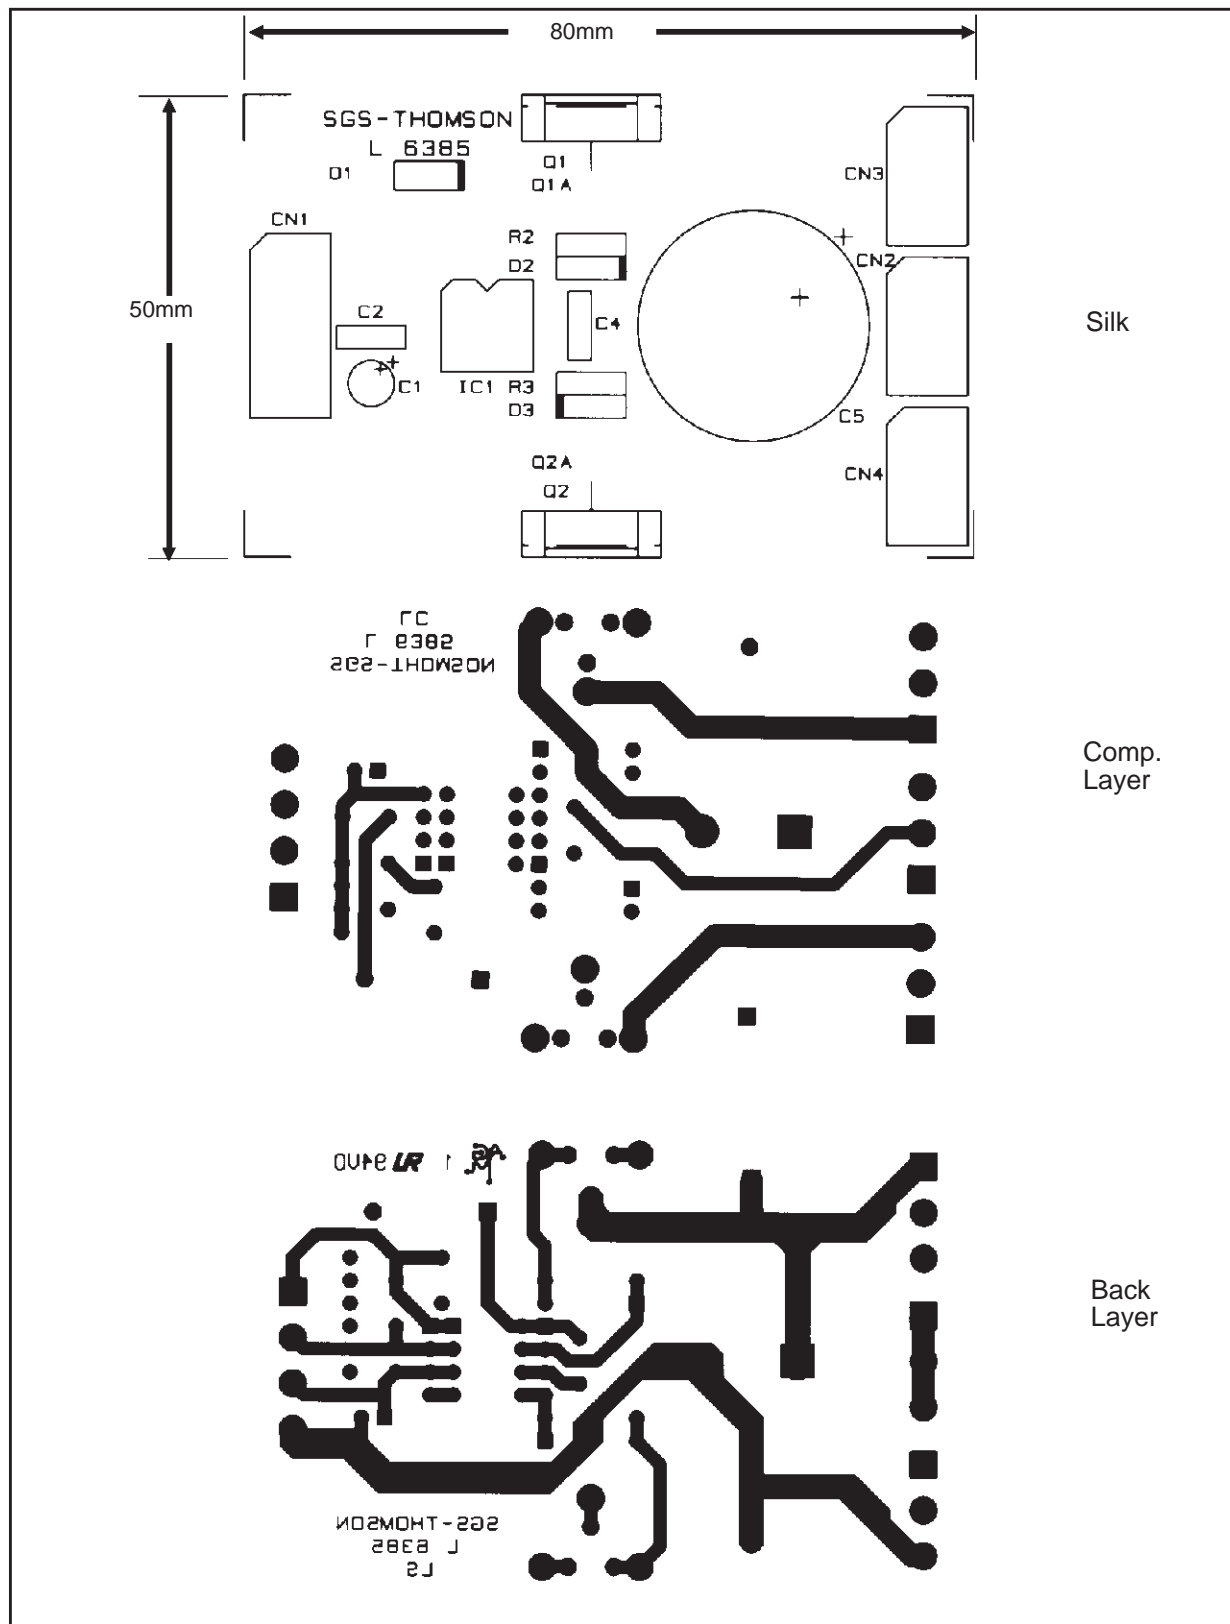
L6385 - PCB and component layout of the fig. 5.
